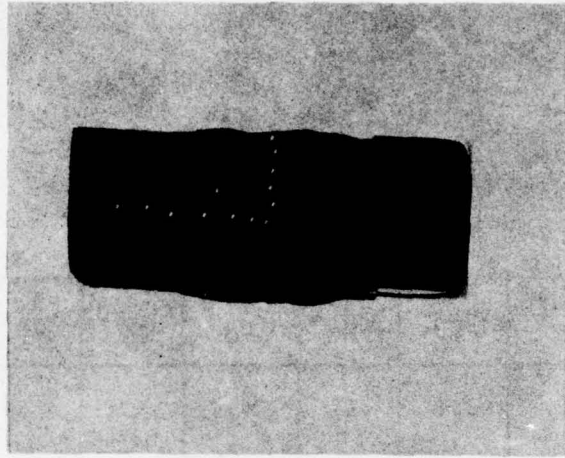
Weld Cross Sections with Hardness Impressions
